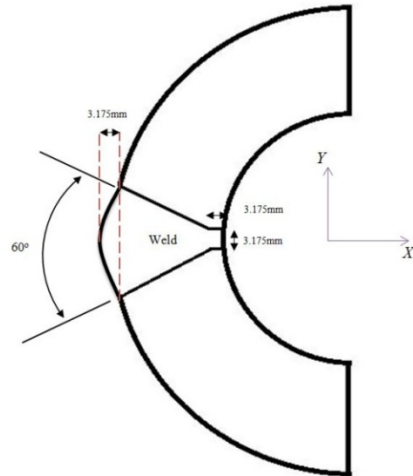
Single butt-welded joint in thick-wall cylinder
